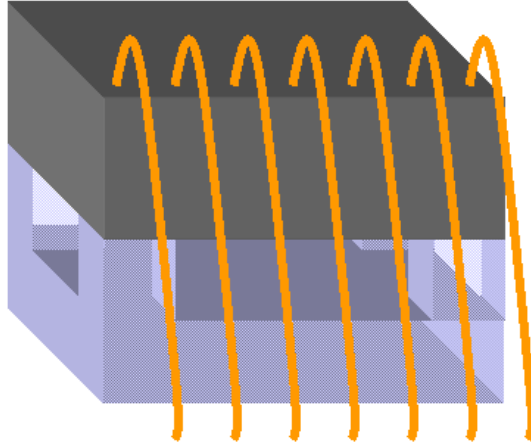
The chip placed on the glass carrier and the bond wires connecting the chip to the PCB.
